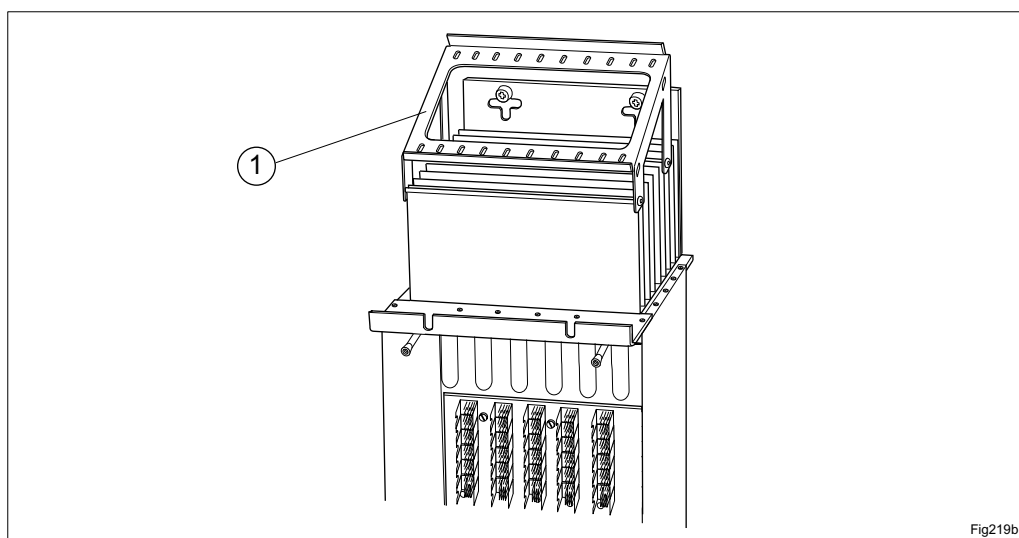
Installing the magazine on a wall and fitting the cable holders.
